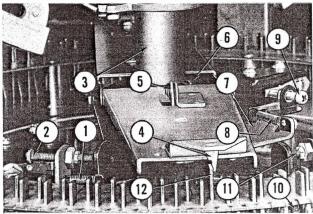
STOP SCREW ADJUSTMENT, SELECTOR CRANK
